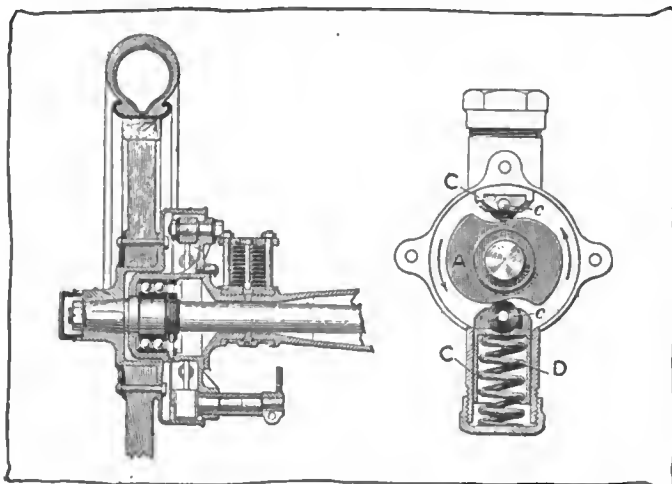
French wheel drive. Fig. 10—Ballet's spring device
